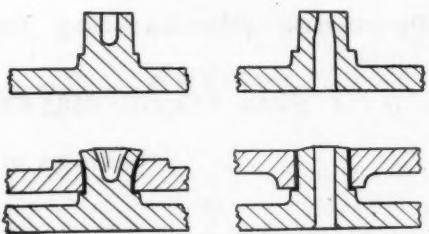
Assembly by spreading the internal bore of a hollow rivet
